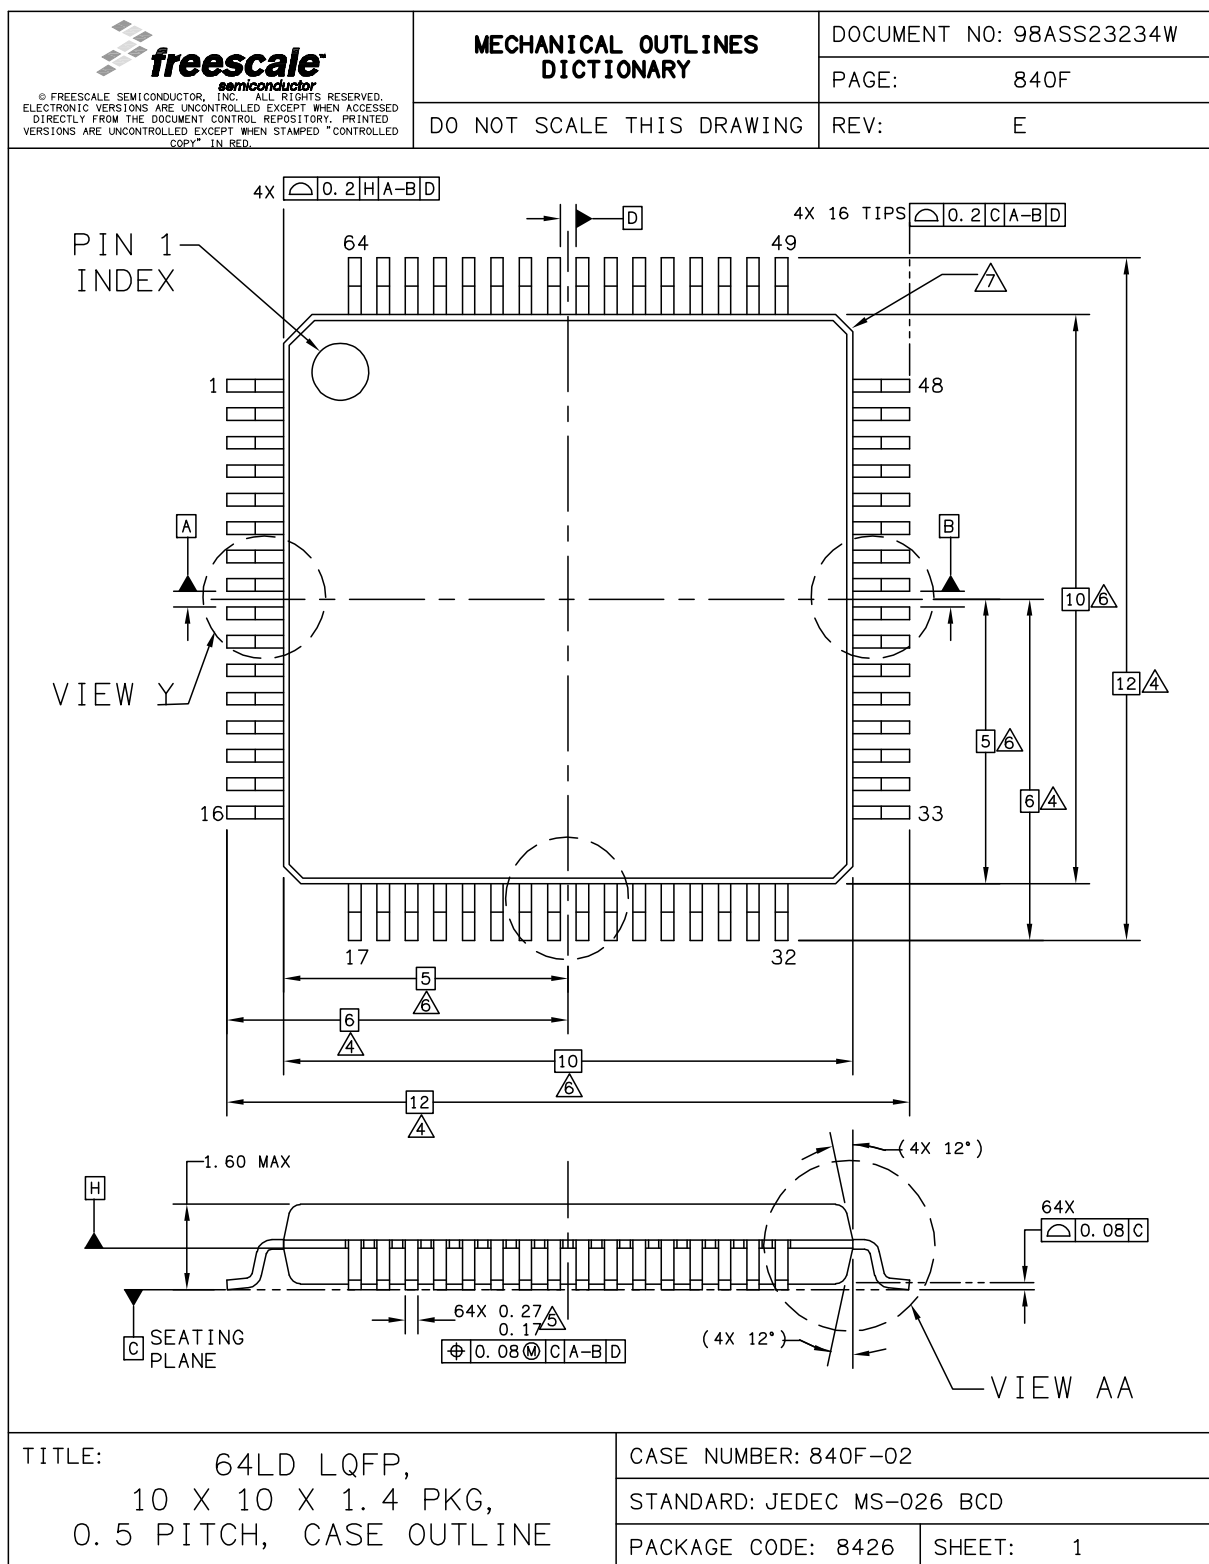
64 LQFP mechanical drawing (part 1 of 3)
